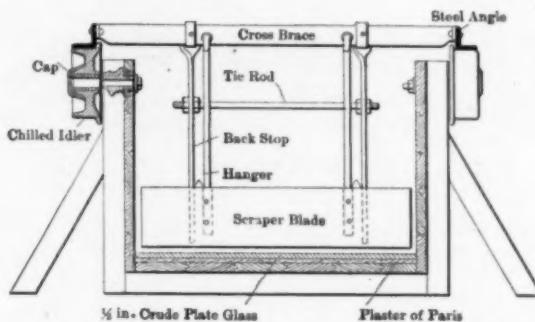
TRANSVERSE SECTION OF RECIPROCATING CONVEYOR
